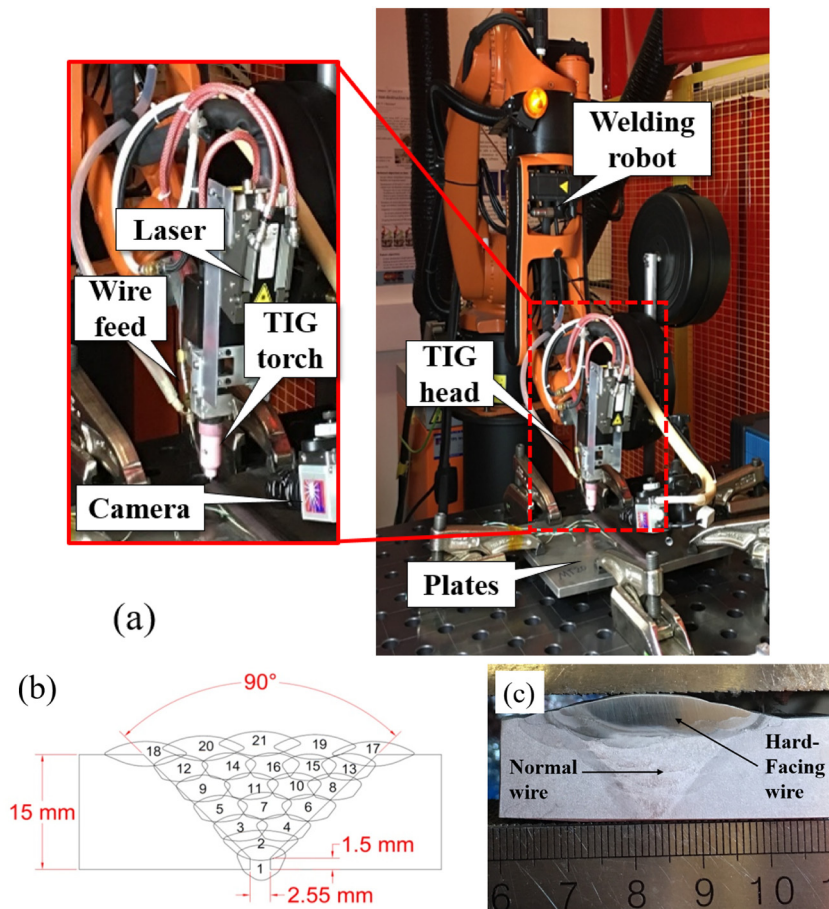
(a) Integrated system of the autonomous TIG welding unit, (b) A schematic of the weld procedure showing the groove, layers, and passes, and (c) A weld section filled with normal wire and hard-facing wire.
